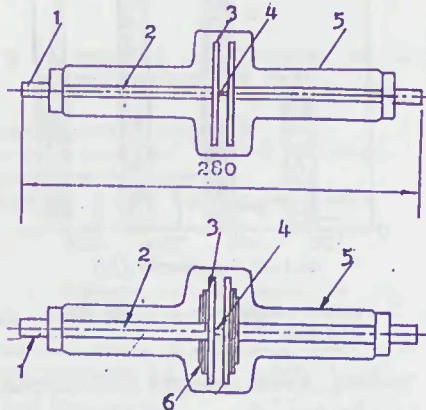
A Horse Shoe Core Type of Axial Magnetic Field Vacuum Fuse
